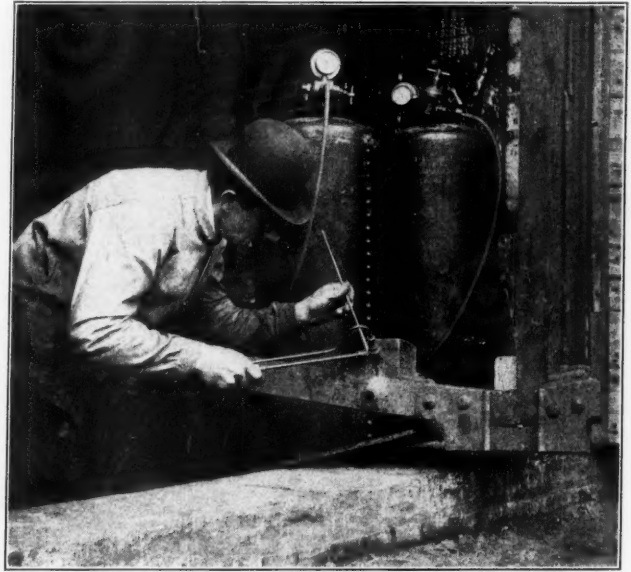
Welding a Cracked Truck Bolster.
